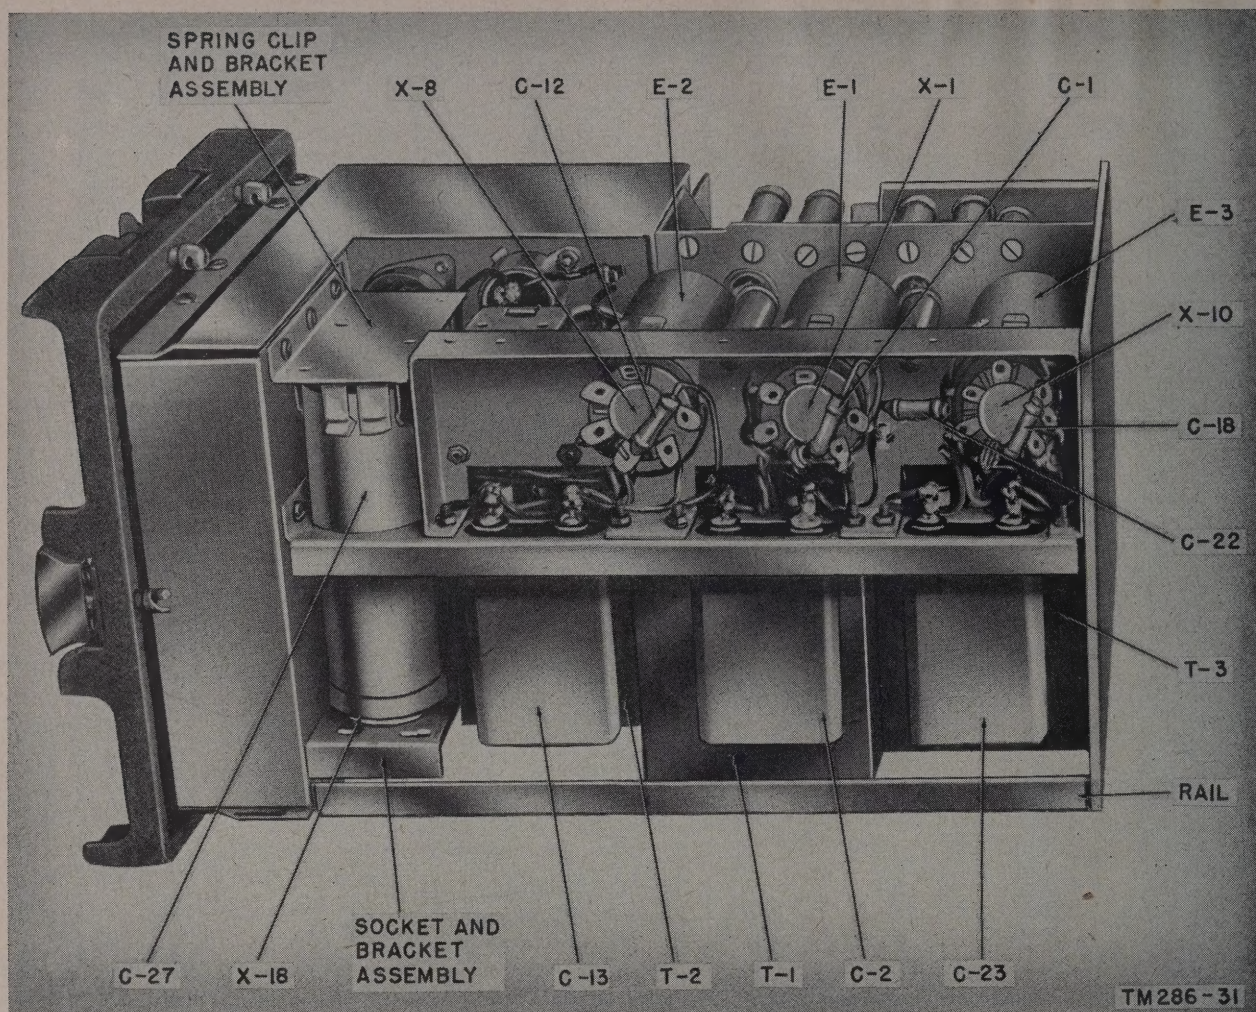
Power Supply PP-112/GR, bottom view of chassis.
